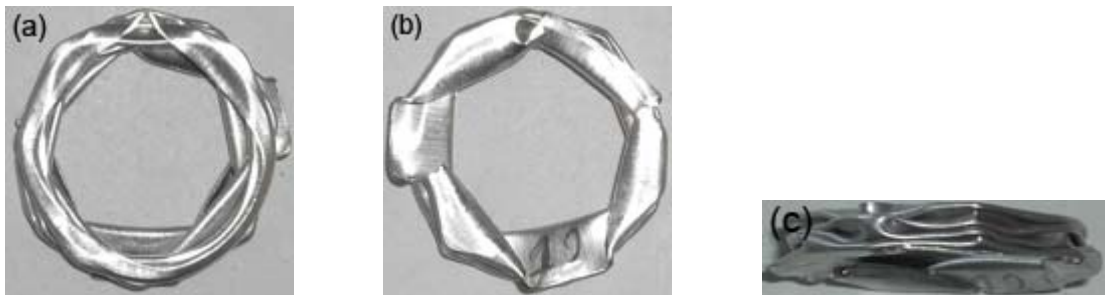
Pictures of tube deformation in diamond mode: (a) front, (b) back and (c) side views.
